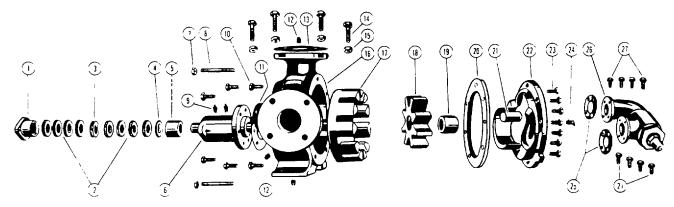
EXPLODED VIEW MODEL LL32 PUMP
